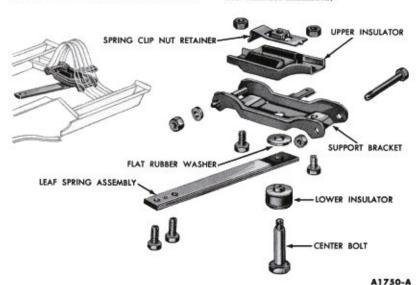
Engine Cantilever Leaf—Spring Rear Support
